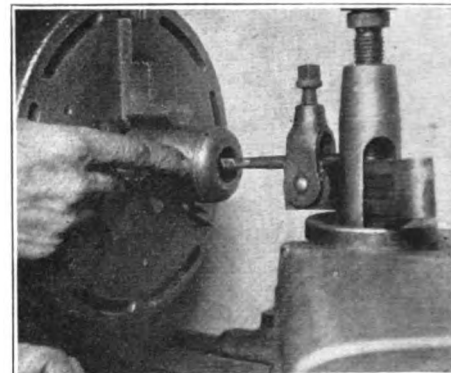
Setting the Boring Tool Bar and Holder in Tool Post.
